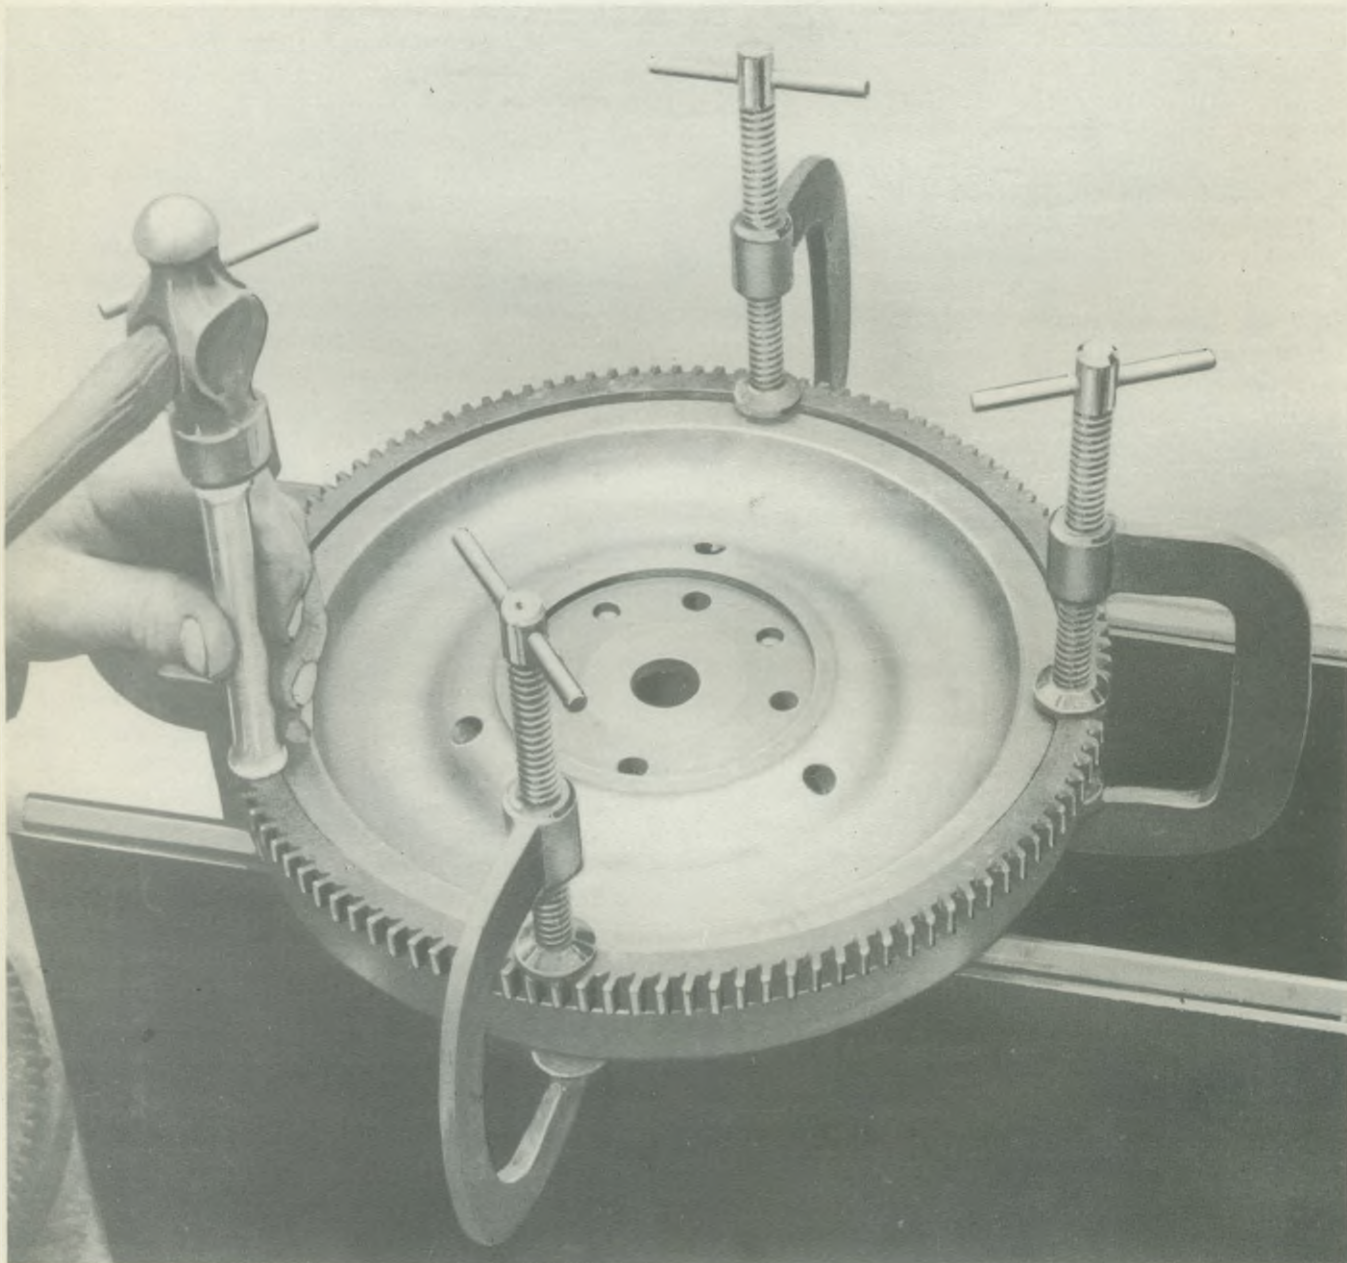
Indicates the use of "G" Clamps when fitting new starter ring
